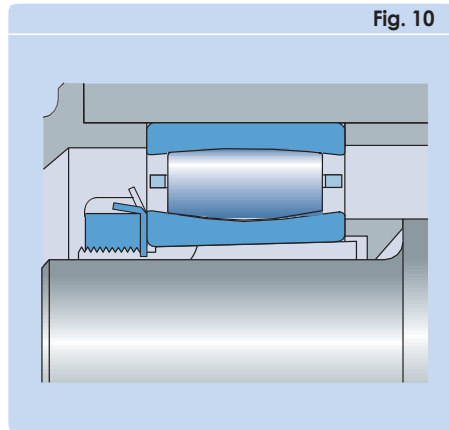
Inner ring on an adapter sleeve and a stepped shaft, axially located against a spacer ring
